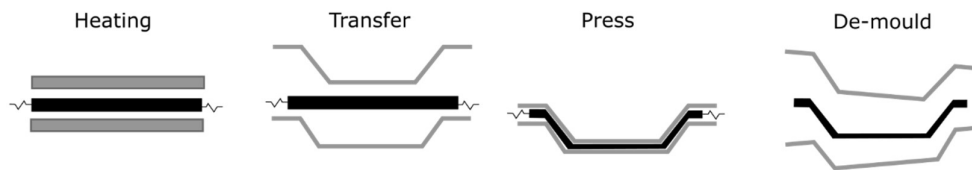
Press forming process. Part is first heated under infrared heater, then transferred to press, press formed into shape before being demoulded after cooling.
